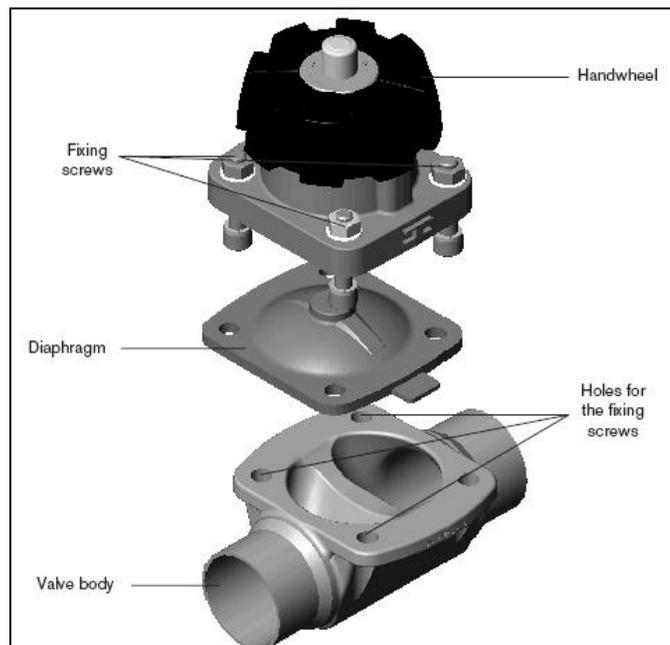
Disassembled drawing of the manual diaphragm valve 3233
